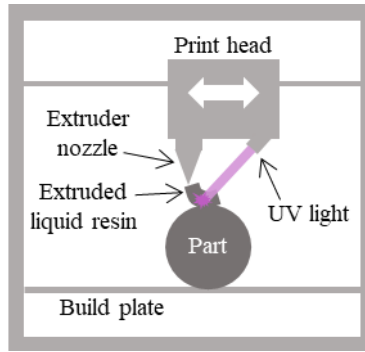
Schematic of a UV-DIW printer, showing that the UV light cures the liquid resin extruding from the extruder nozzle on the build plate while the printhead moves.
